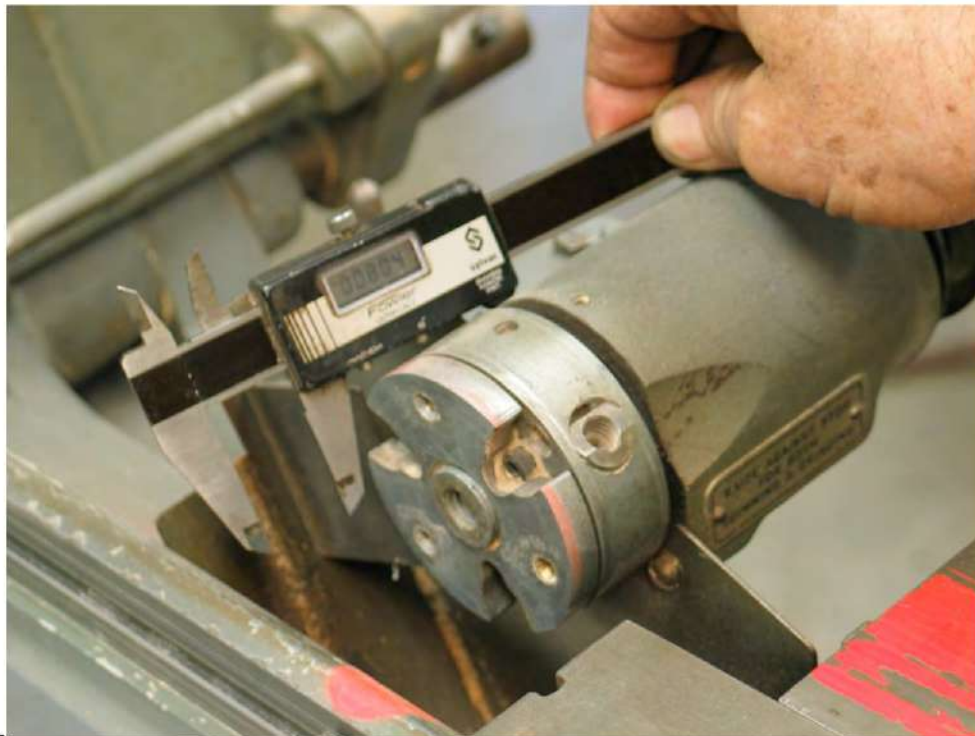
The stub arbor measured .804 on this specimen and would have to be turned down to take a blade with a 5/8 inch bore
